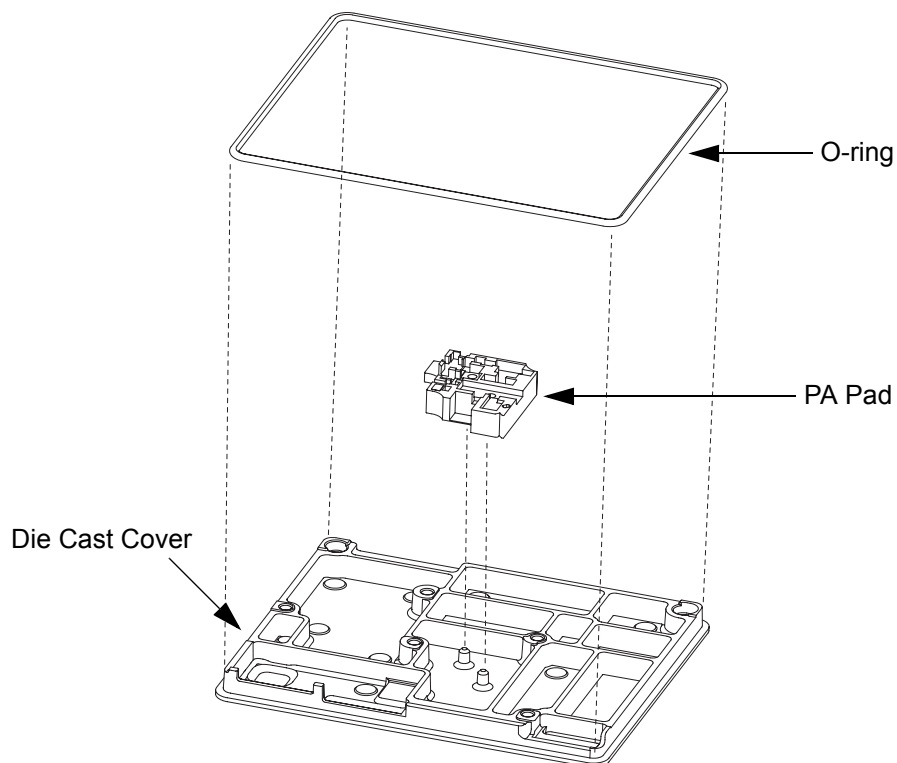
Assembling of PA Pad and O-ring (VHF models)
